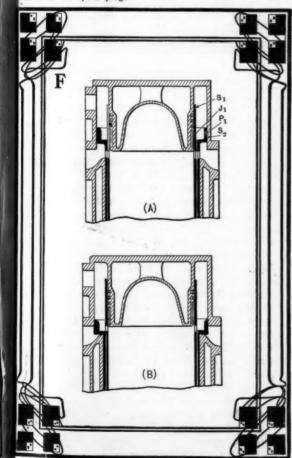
Fig. F-A shows section of motor with sleeves open. B shows position of outer sleeve when valves are closed
